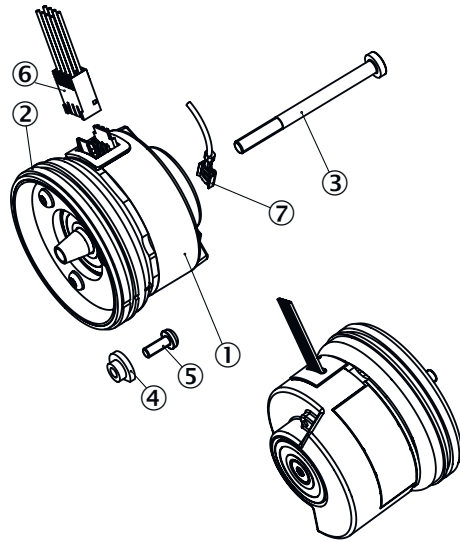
Motor feedback system with Tapered Shaft and Resolver Style Support
